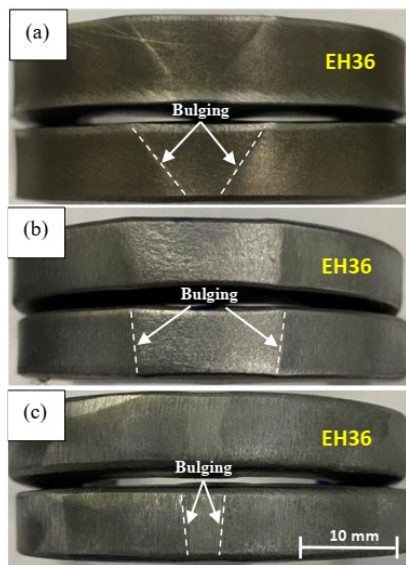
Macrostructures of 6 specimens: (a) bulging after test side bend, (b) bulging after test face bend, and (c) bulging after test root bend.
